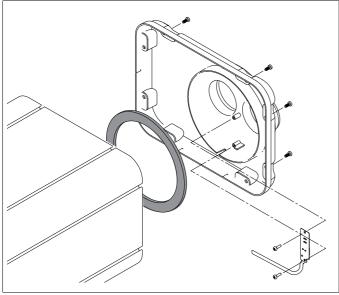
Install metal retaining plate, gasket and housing cover with hot air outlet.
